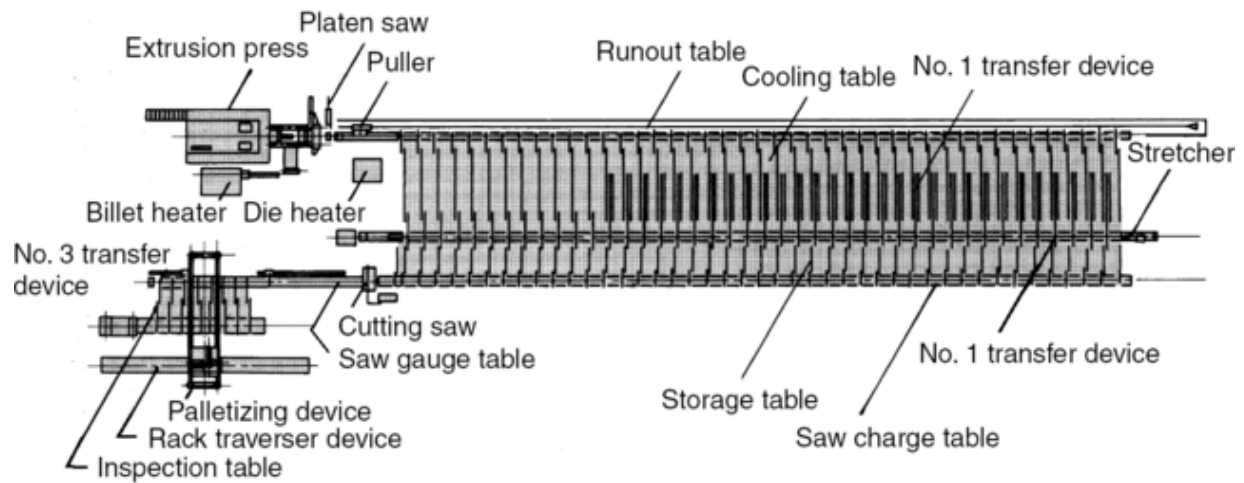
Layout of a typical aluminum hot extrusion installation [6].
